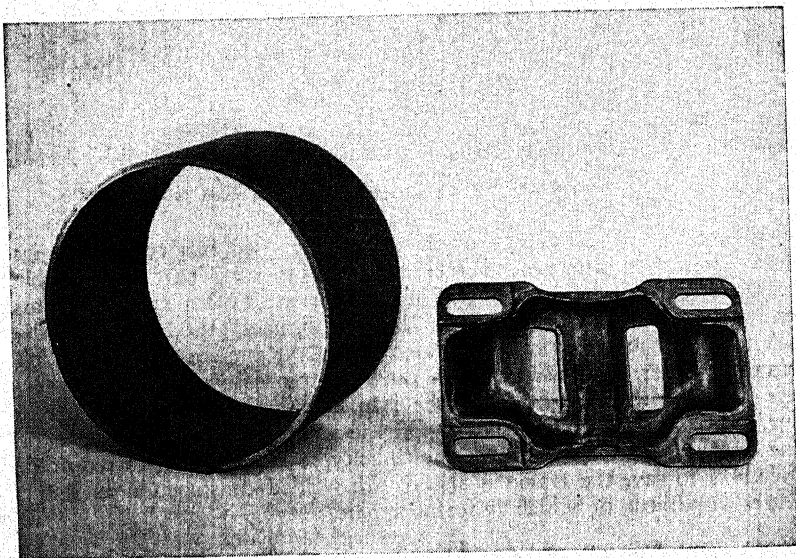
Parts for arc welded ¼ horsepower motor frame.
